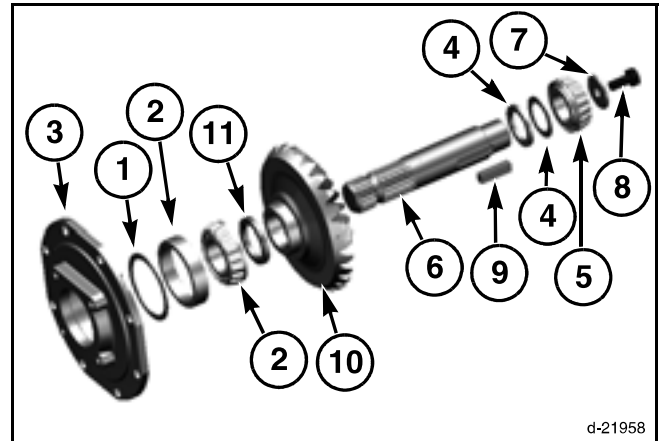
Assemble shim (1), outer ring (2) inside cover (3), using pipe and hammer.
